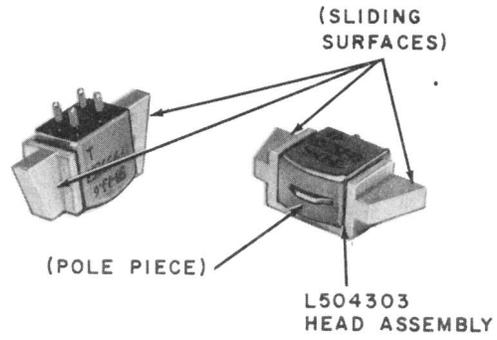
Magnetic Head Assembly Removed From Head Bar Assembly
